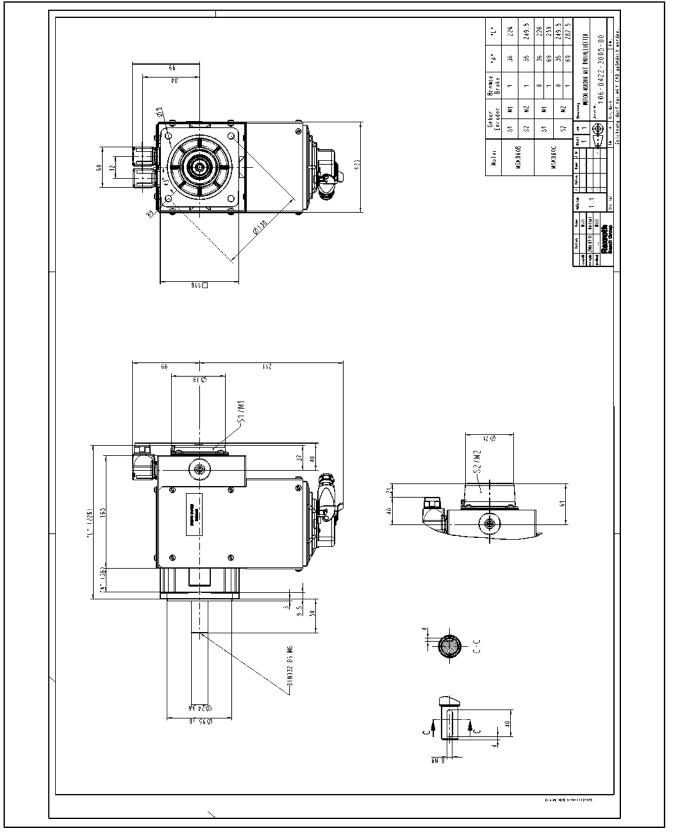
Dimension sheet MSK060 with radial fan unit
